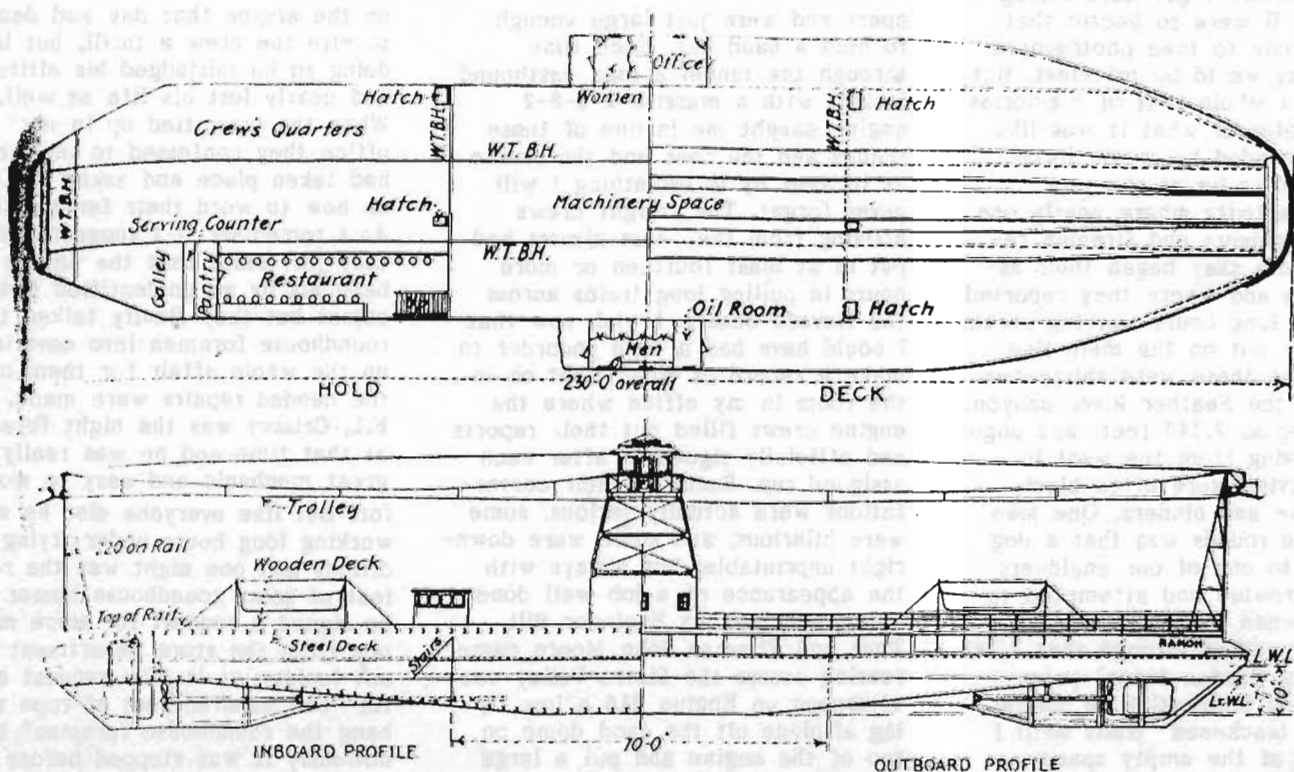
Deck Plan and Outside Profile of the Ramon
